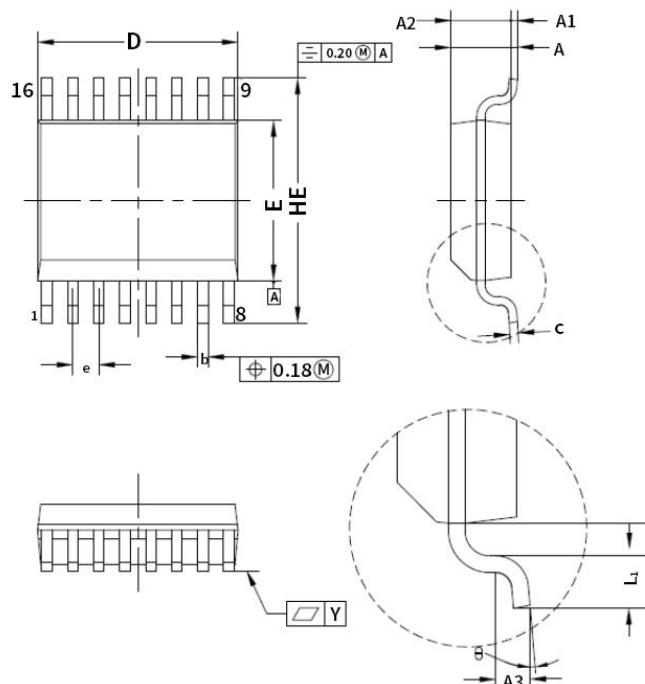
SOP16(300mil)/SOW16 Package Shape and Dimension in millimeters
